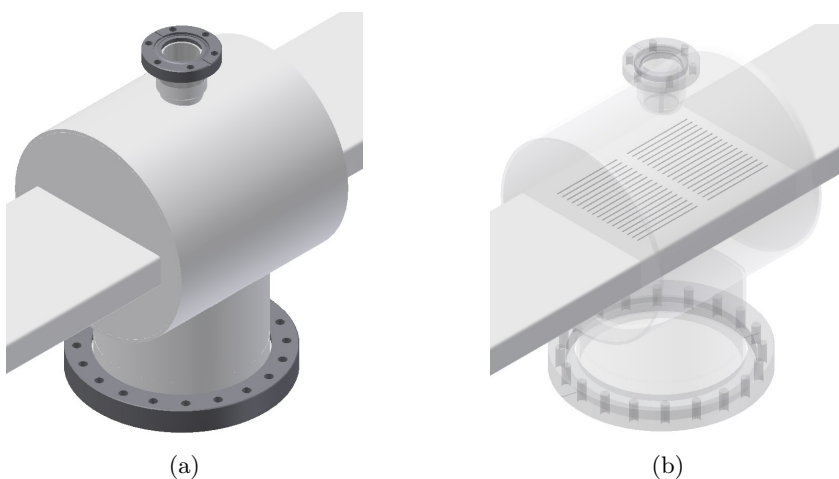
Lumped pumps are installed at pump ports comprising a shroud (Fig. 2.2.6a) welded around the extrusion with pumping slots and (Fig. 2.2.6b) cutting through both top and bottom.
